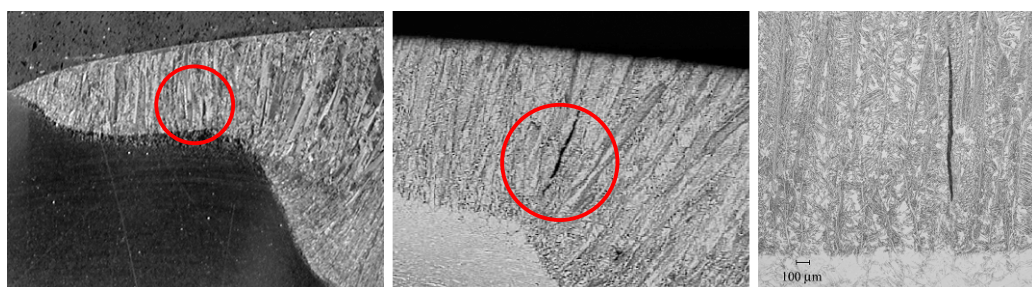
Hot cracks in submerged arc welds in 22%Cr duplex stainless steel.
